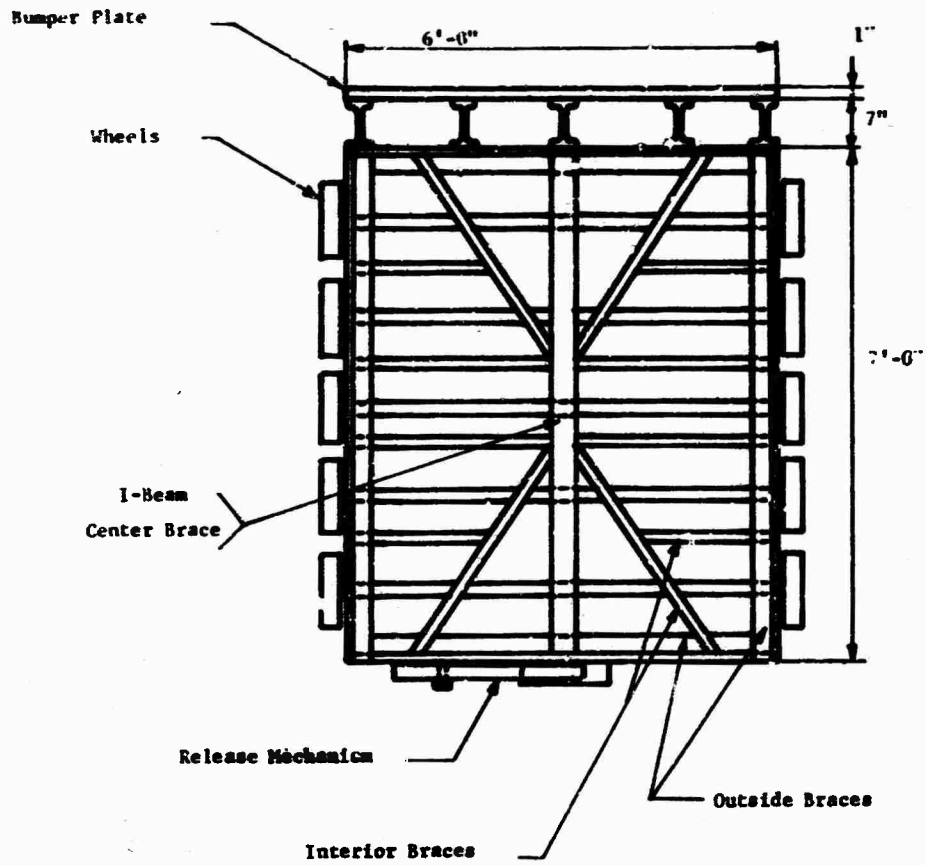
TOP VIEW OF CRASH CART WITH TOP PLATE REMOVED
